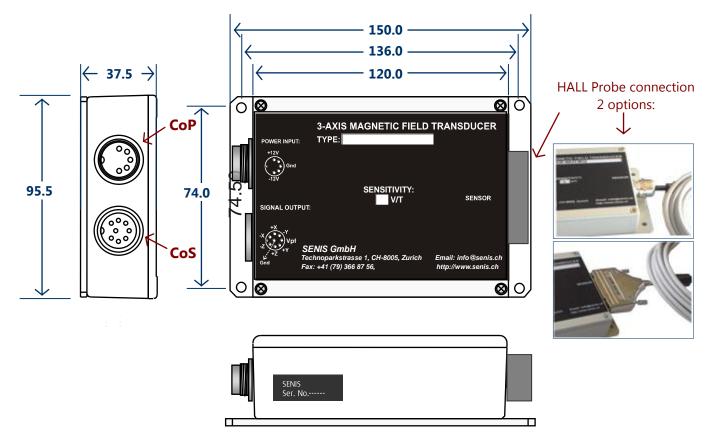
Structure, dimensions and tolerances of the 3-channel analogue electronic module
